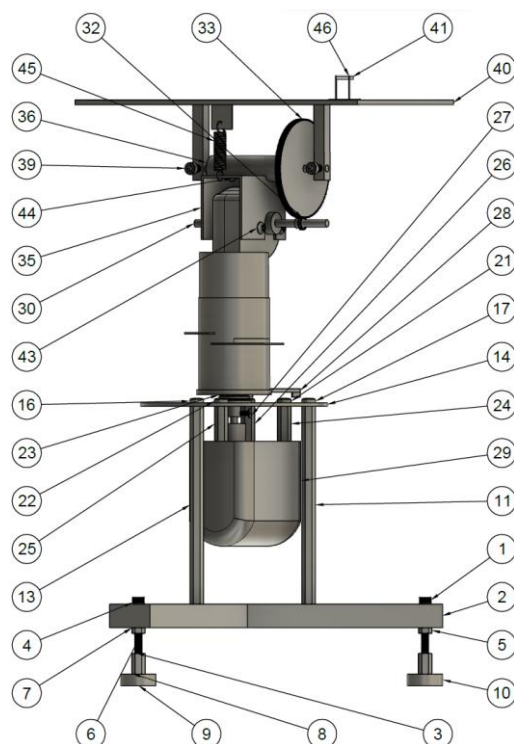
The 3D model of the mobile rotating mechanism, without electronics and casing, setting "A"
